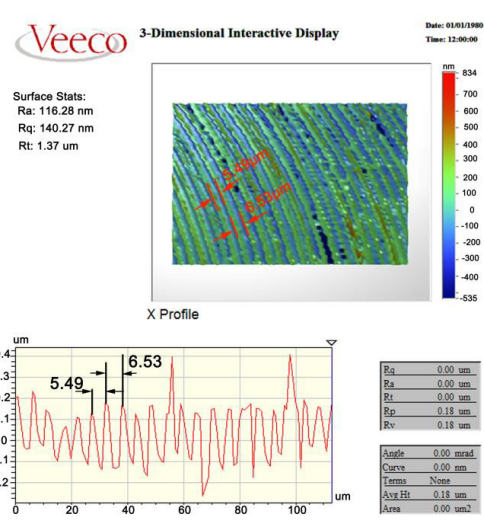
Surface measurement results with 1μm tool runout and 6μm/tooth feed
